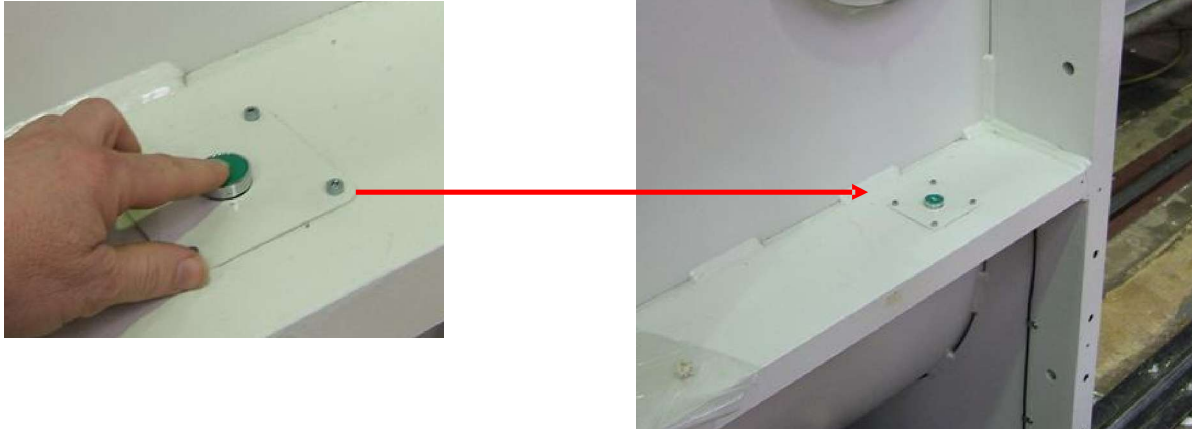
2 Photograph of Traverse Enable Push-button at Rear of Machine
